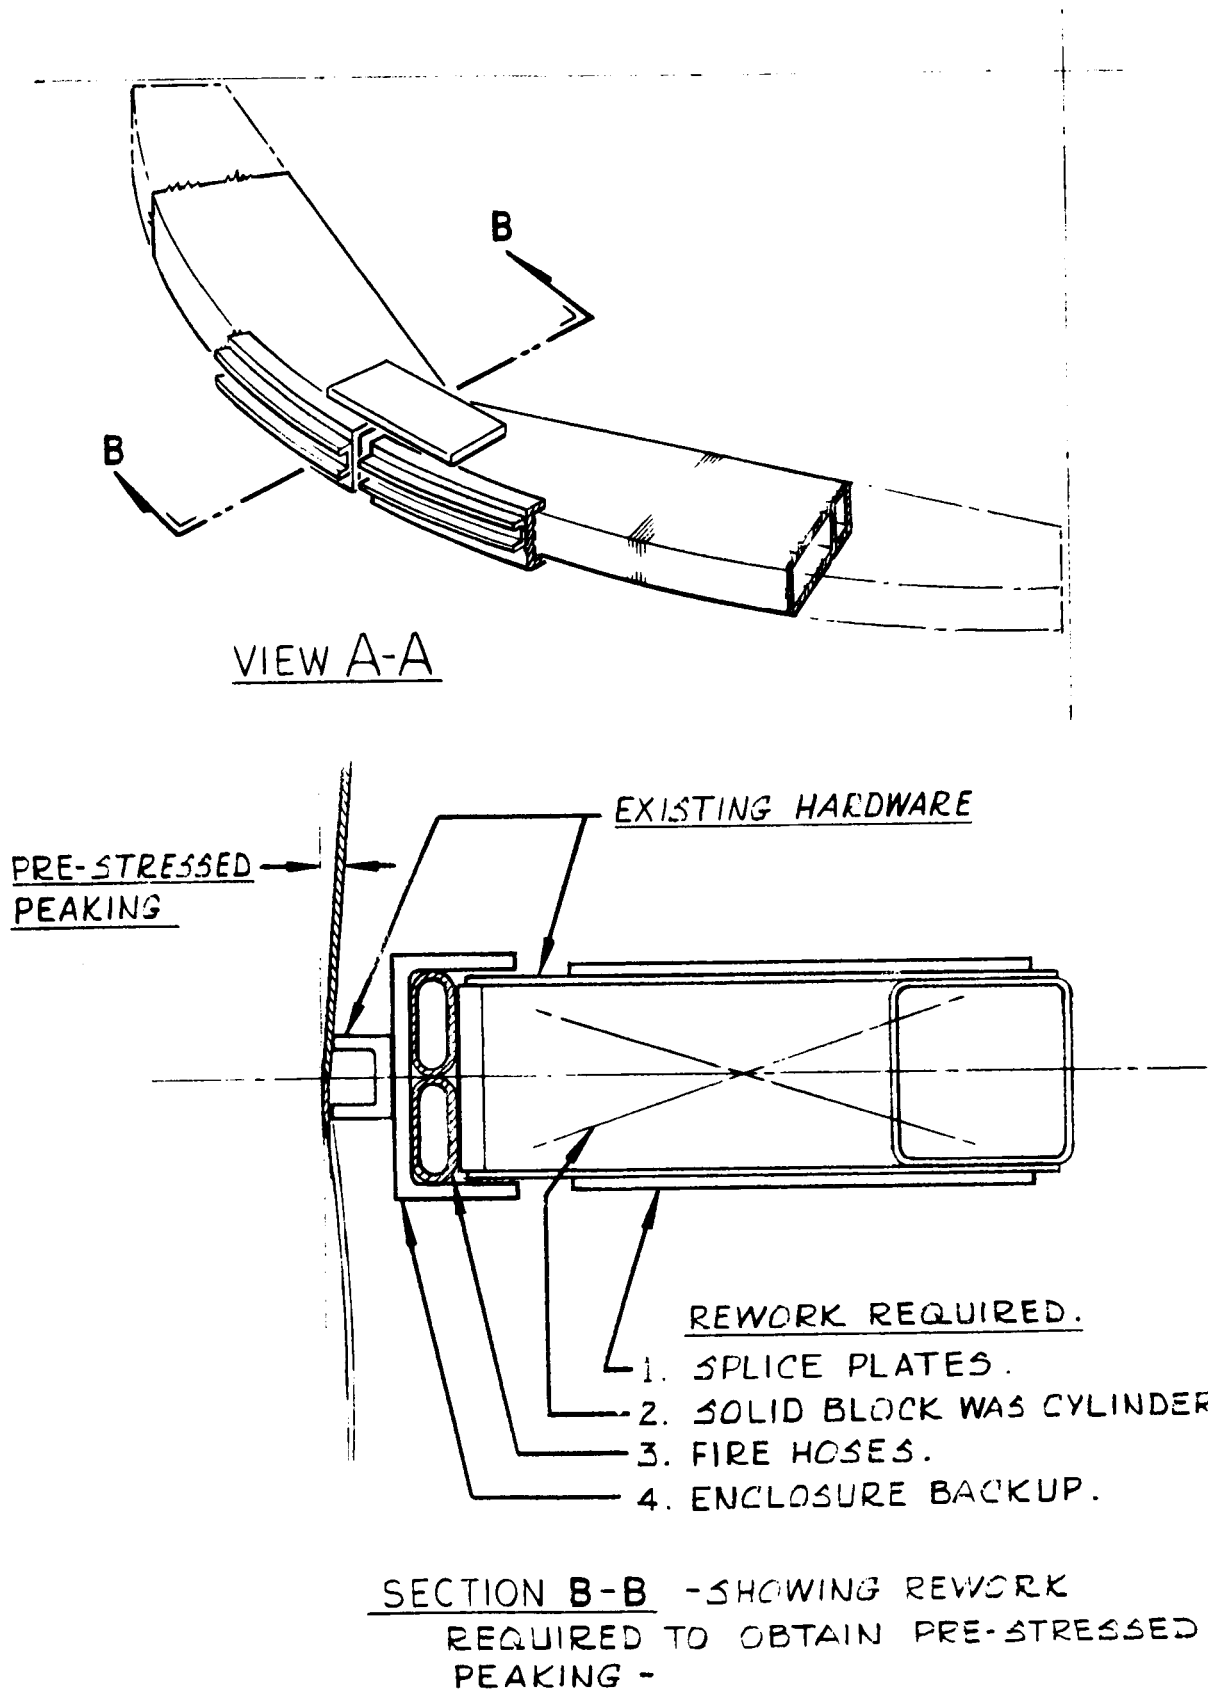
Pre-Strain Welding Design Concepts for S-II Production
